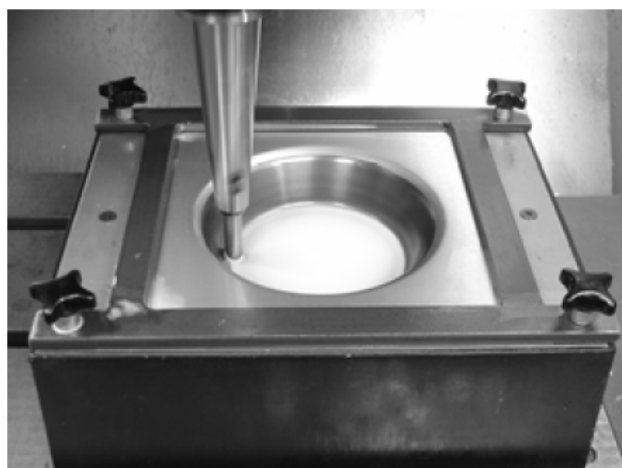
Basic configuration of SPIF: rig, backing plate, sheet and forming tool
